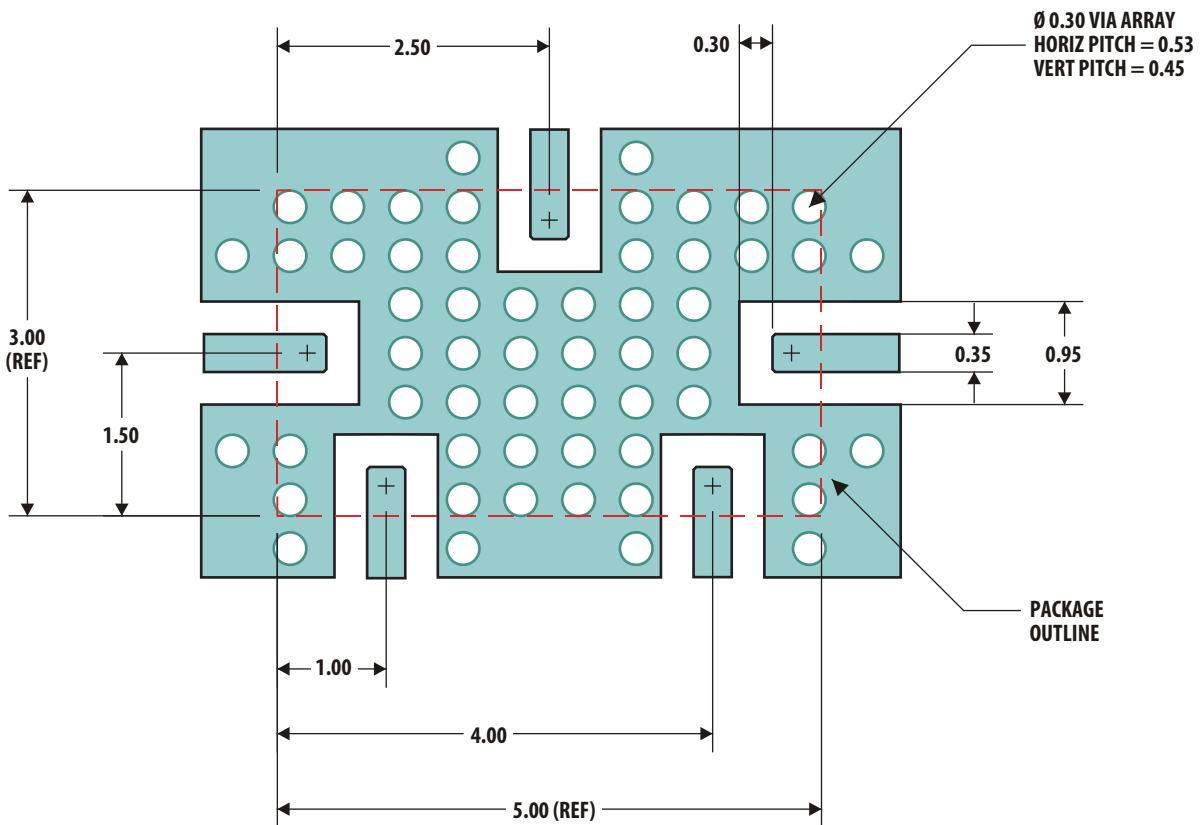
Suggested PCB Layout, Dimensions in mm (top view).
